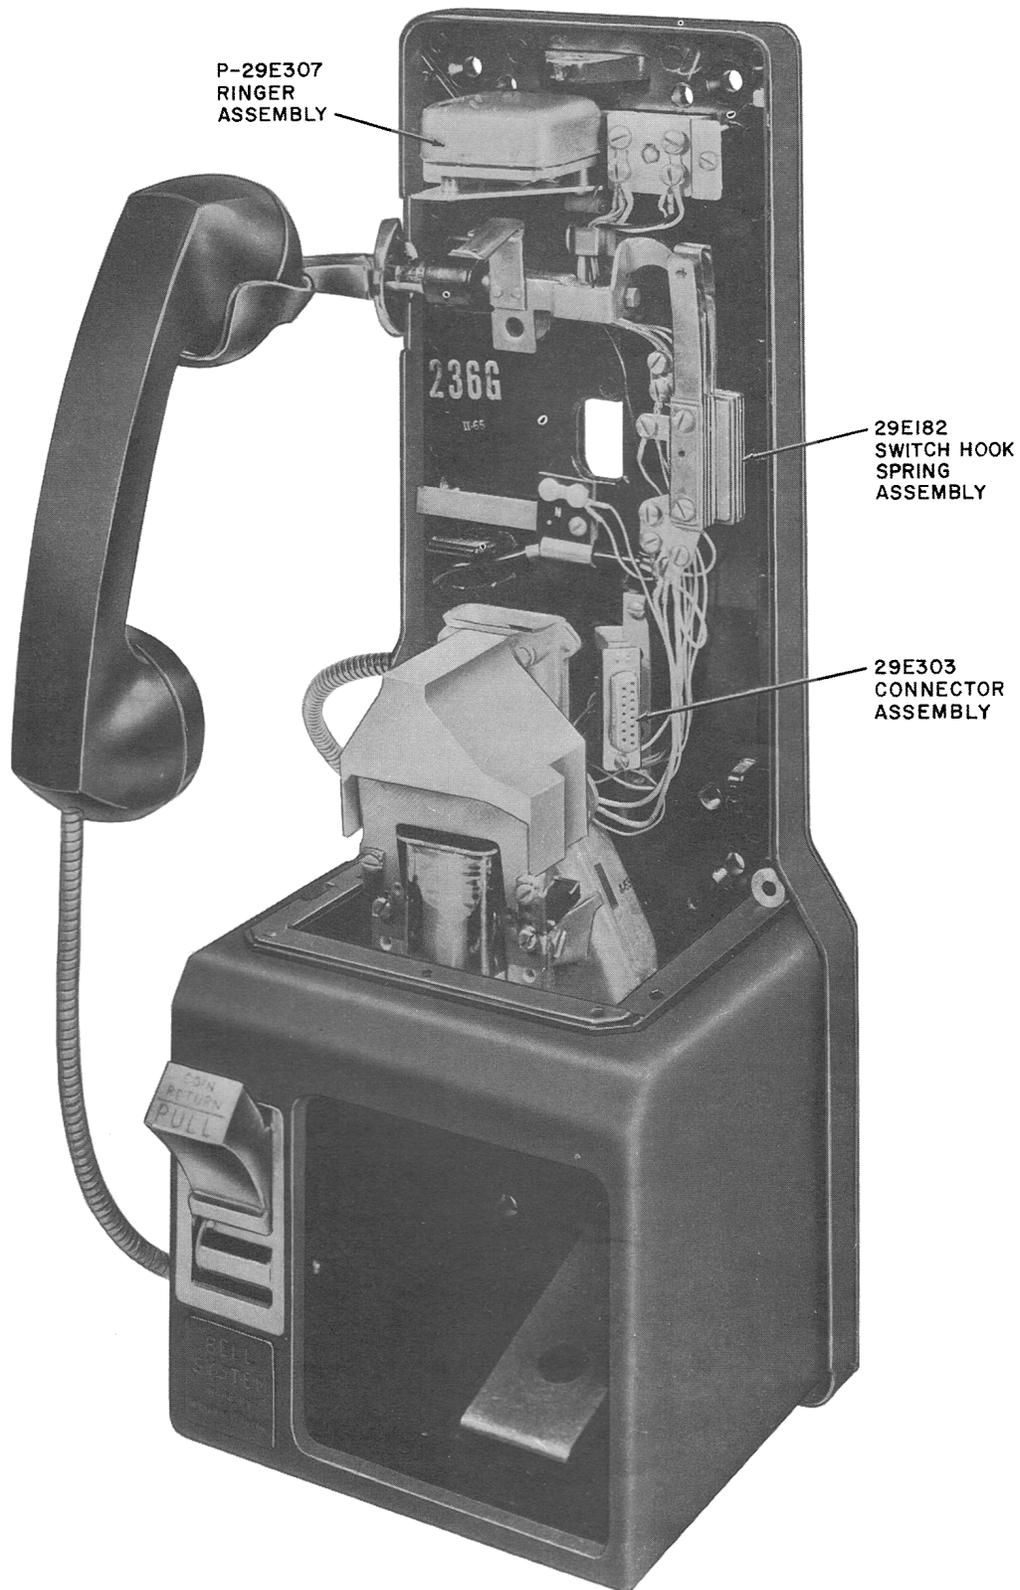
Backplate Assembly — 236-Type Coin Collector
